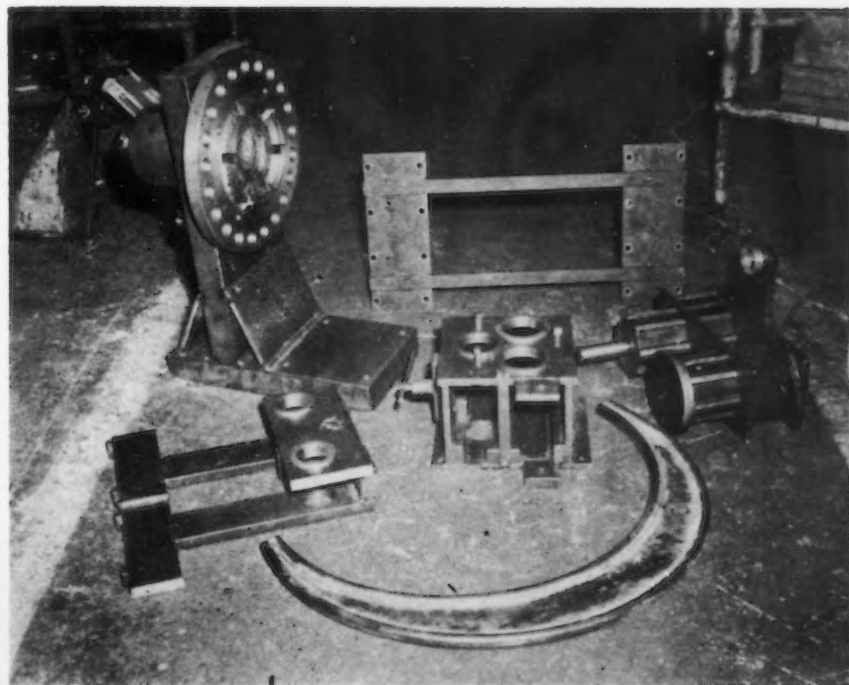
Weld-fabricated jigs and fixtures are used to hold component parts in proper position for welding.
